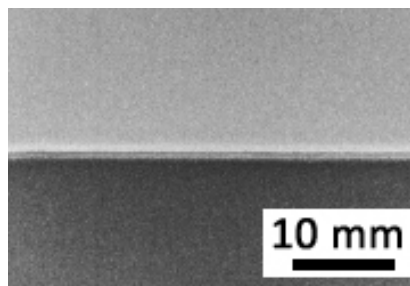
Welding bead x-ray transmitted image; Haynes above, Inconel below
